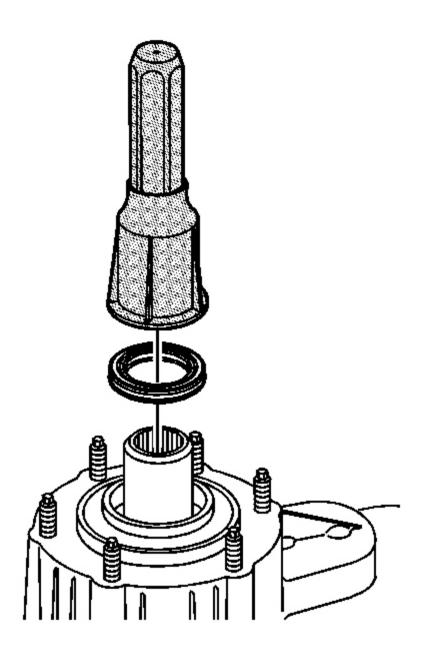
Installing Front Input Shaft Seal By Using J 42738 Courtesy of GENERAL MOTORS CORP.
